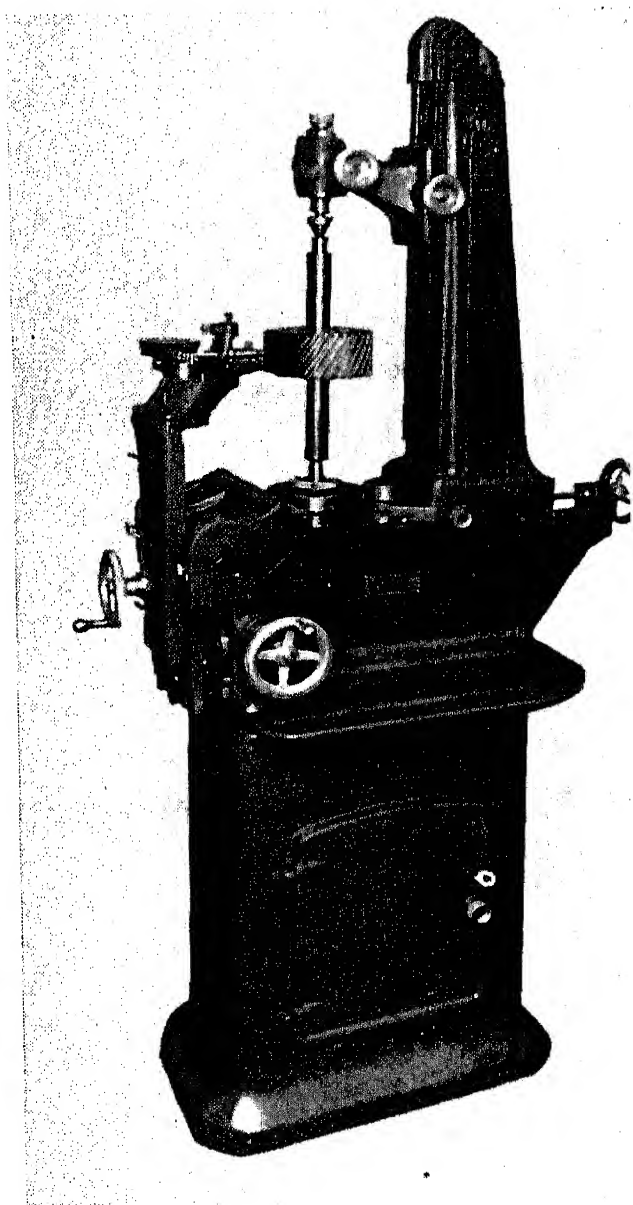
An involute profile measuring machine. (Courtesy Illinois Tool Works Co.)
